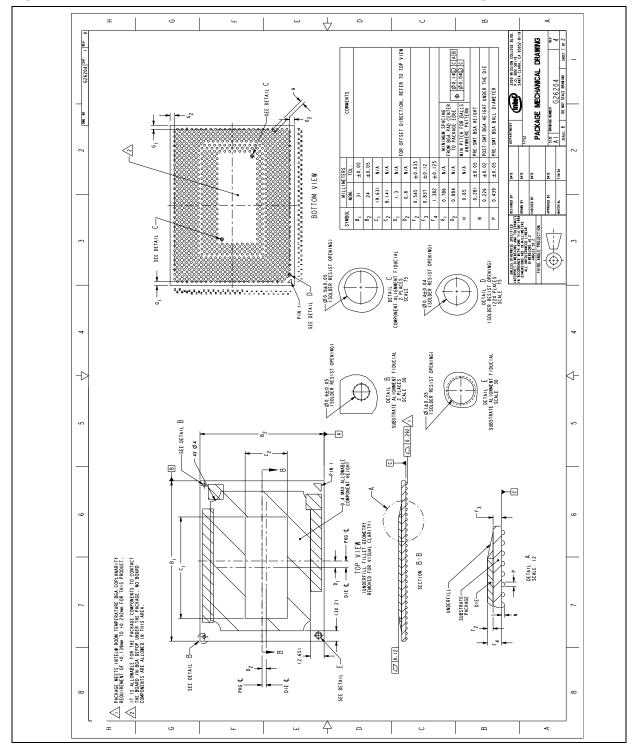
Processor BGA1224 4C/GT2 (G26204) Mechanical Package
